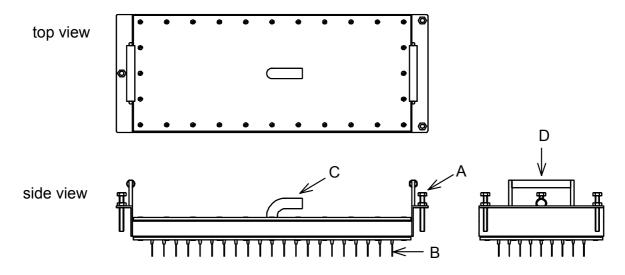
The vacuum sowing mould. A: height adjustment bolt, B: needle, C: air outlet to pump, D: handle.
